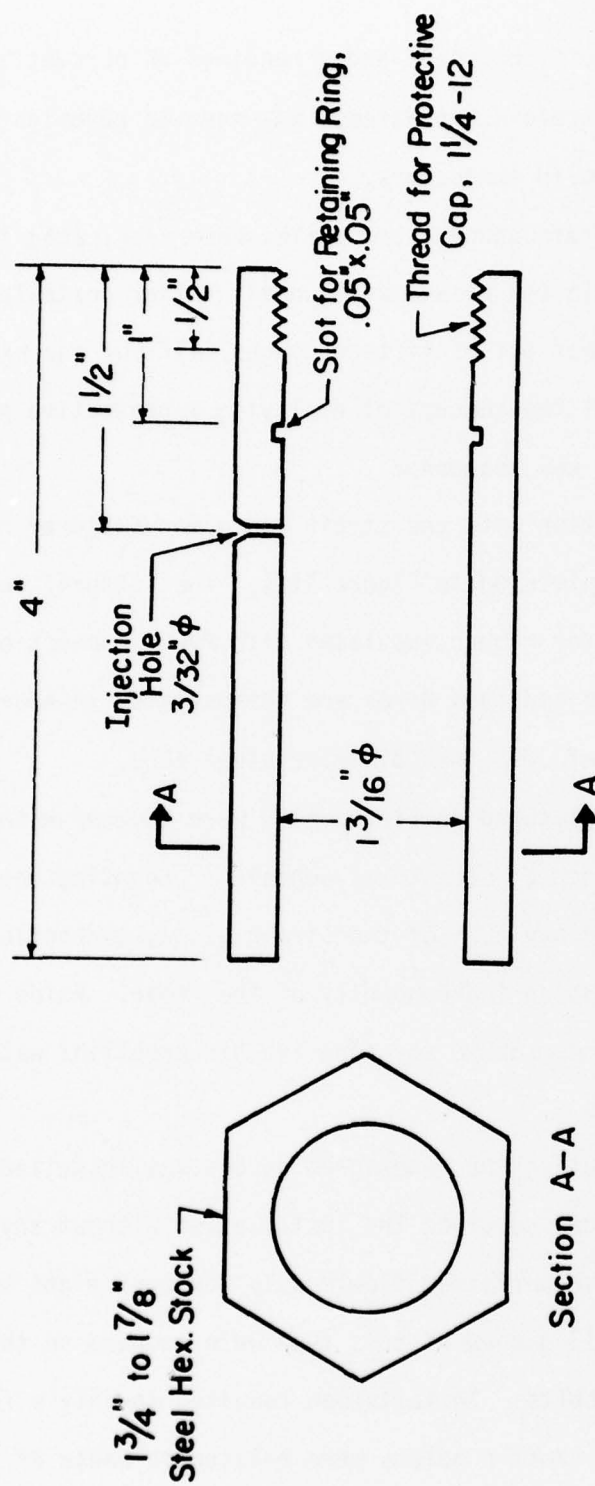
Section of Instrument Head, Shop Drawing, Design Employed at Eisenhower Tunnel
